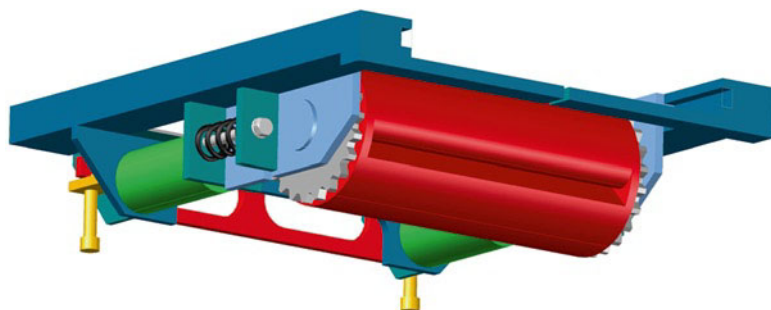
Sketch of the FRP prestressing machine, seen from one beam end side
